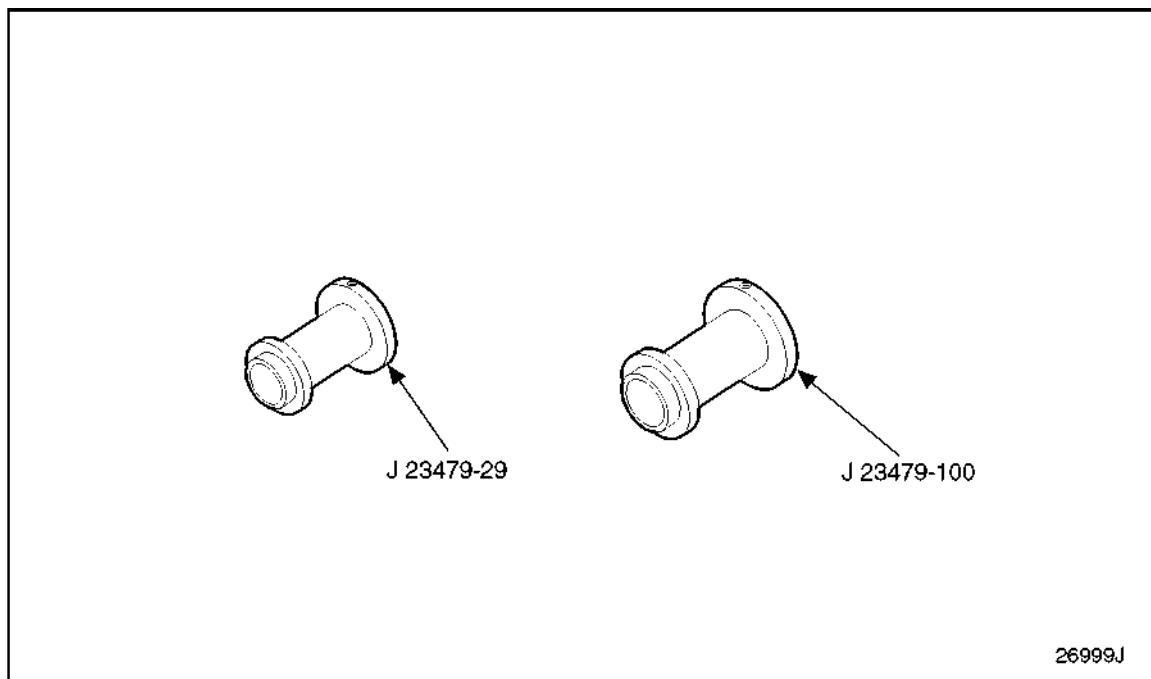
Valve Seat Insert Remover (2 Valve), J 23479-29
